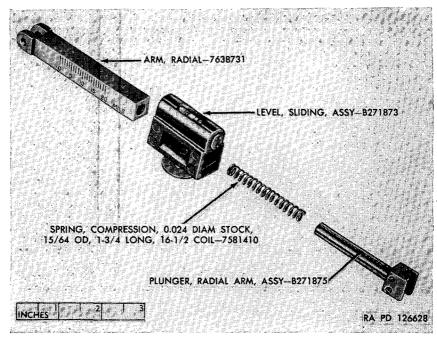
Sliding level assembly B271873 and radial arm plunger assembly B271875 removed from radial arm.
